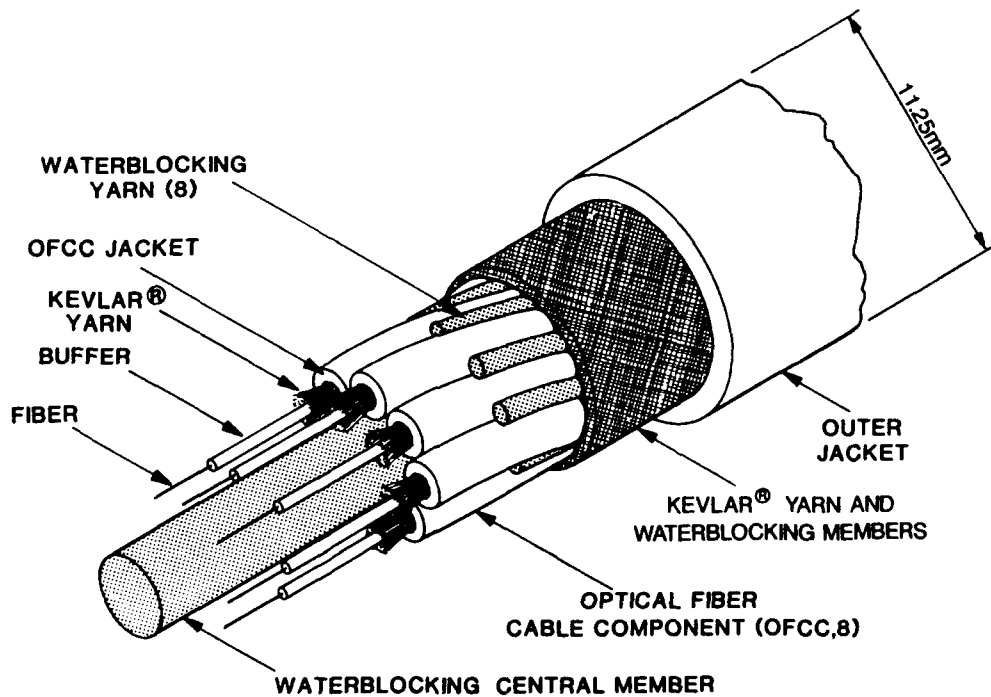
Isometric View of 8-OFCC Shipboard Cable
